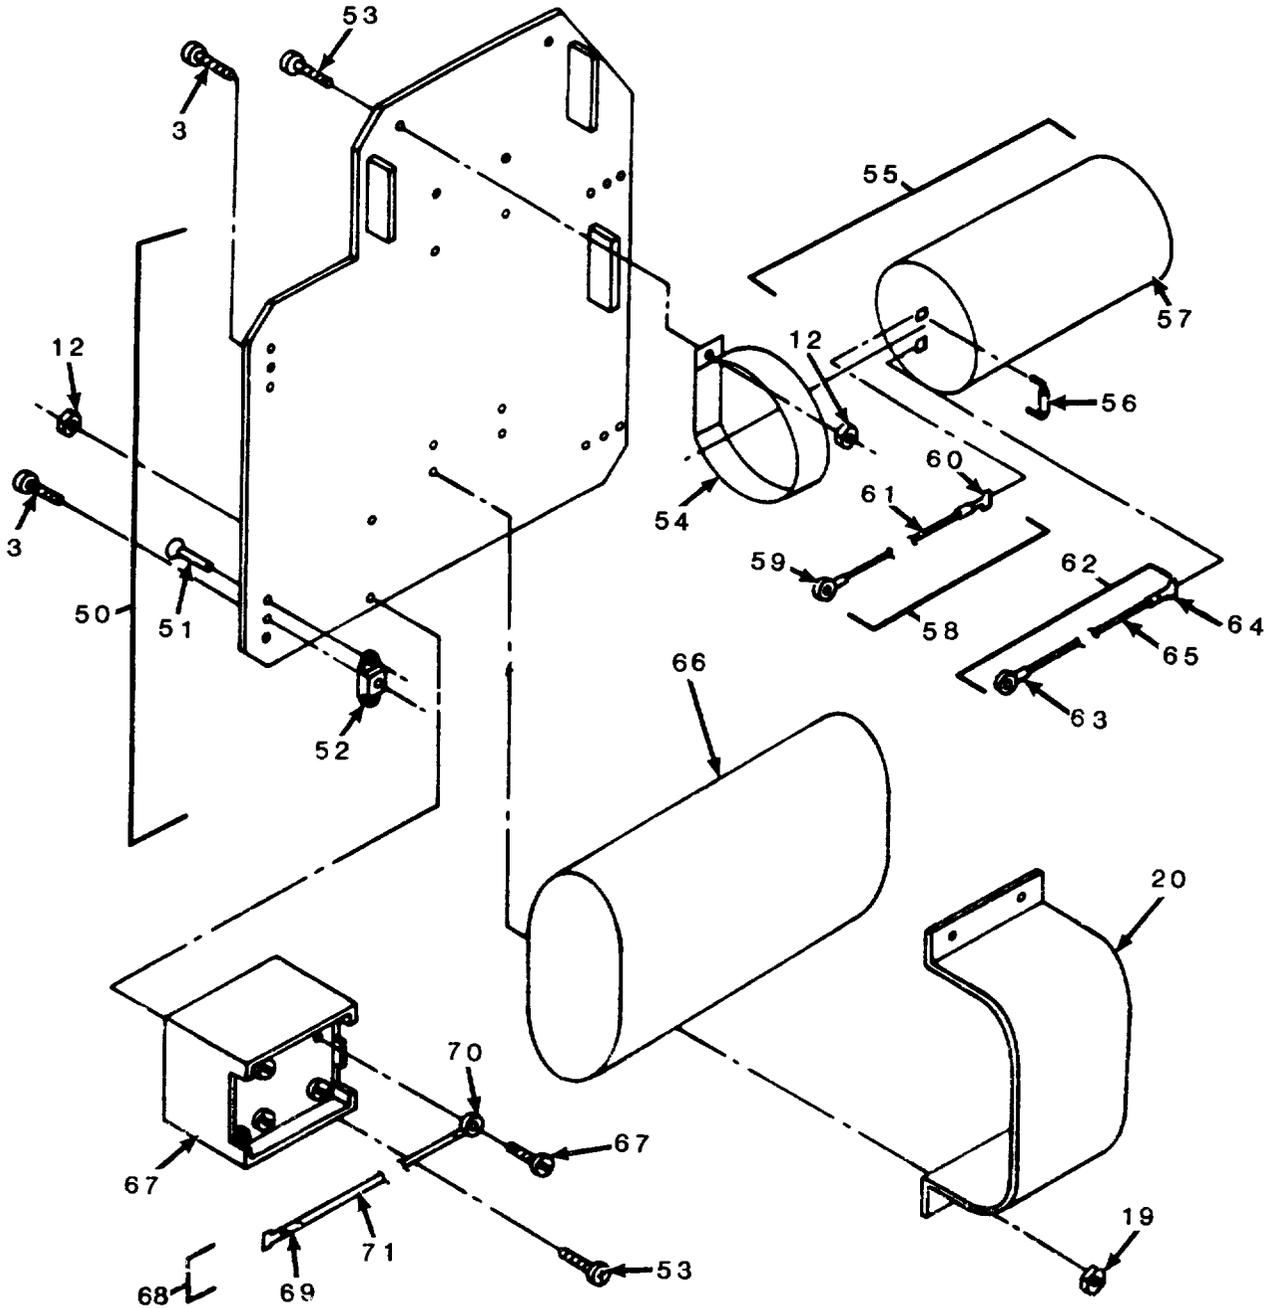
Wiring Harness and Electronic Components (Sheet 2 of 2)
